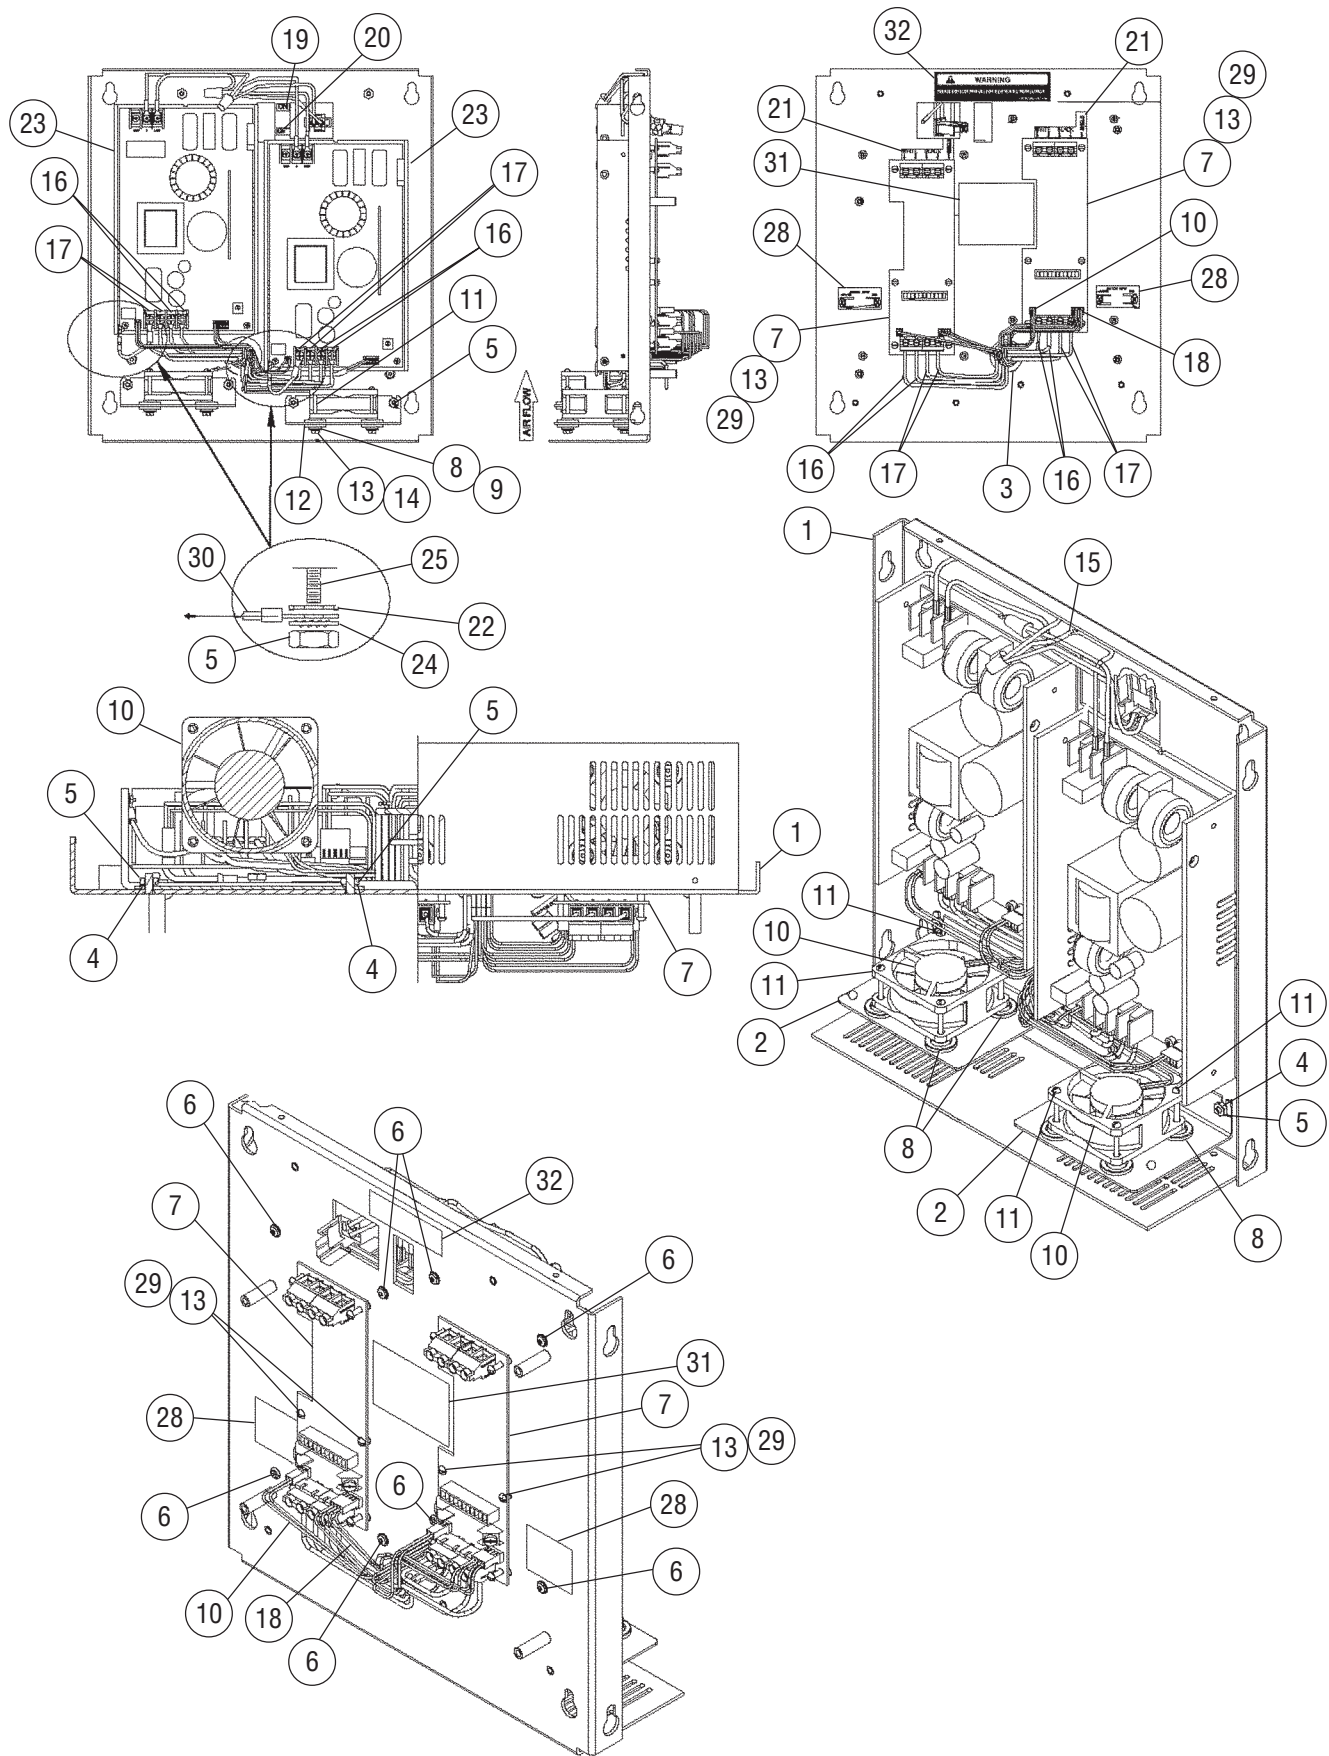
Remote Power Module Back-Up Power Status Assembly Panel (Global)
